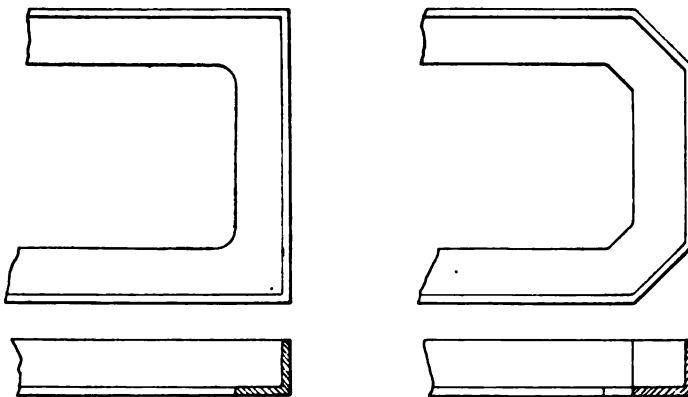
Common Forms of Frames made by Bending and Welding.
